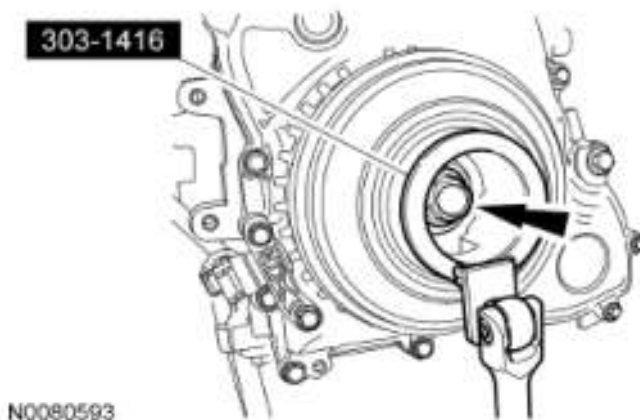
Locating Crankshaft Pulley With Crankshaft Damper Holding Tool
